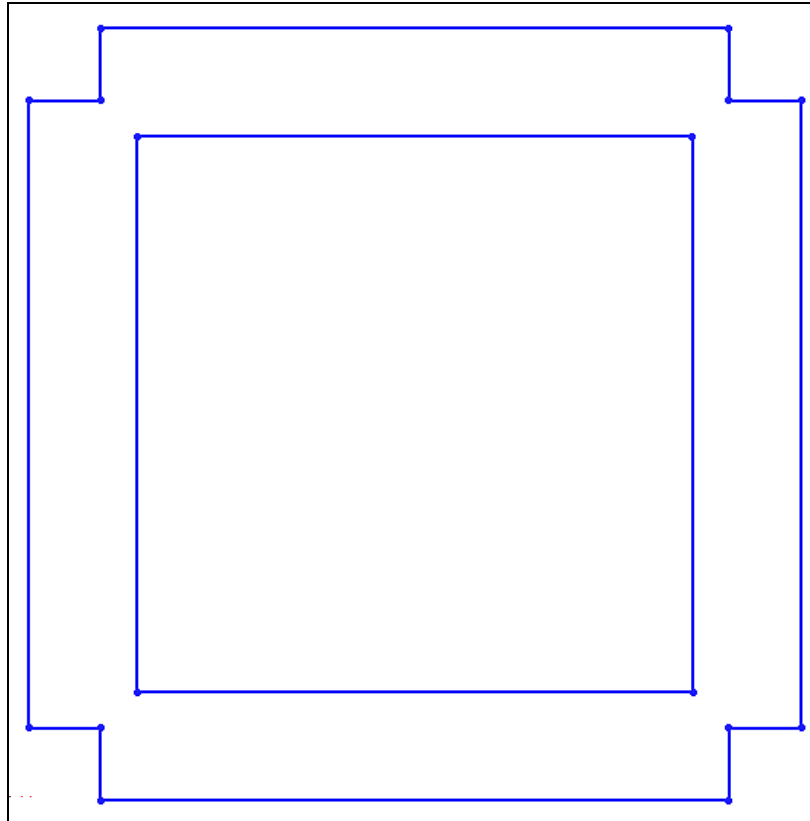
The basic pattern for cutting the fabrics for fabricating a composite part by the setup in figures 3 and 4. The intended part size is that of the inner box.
